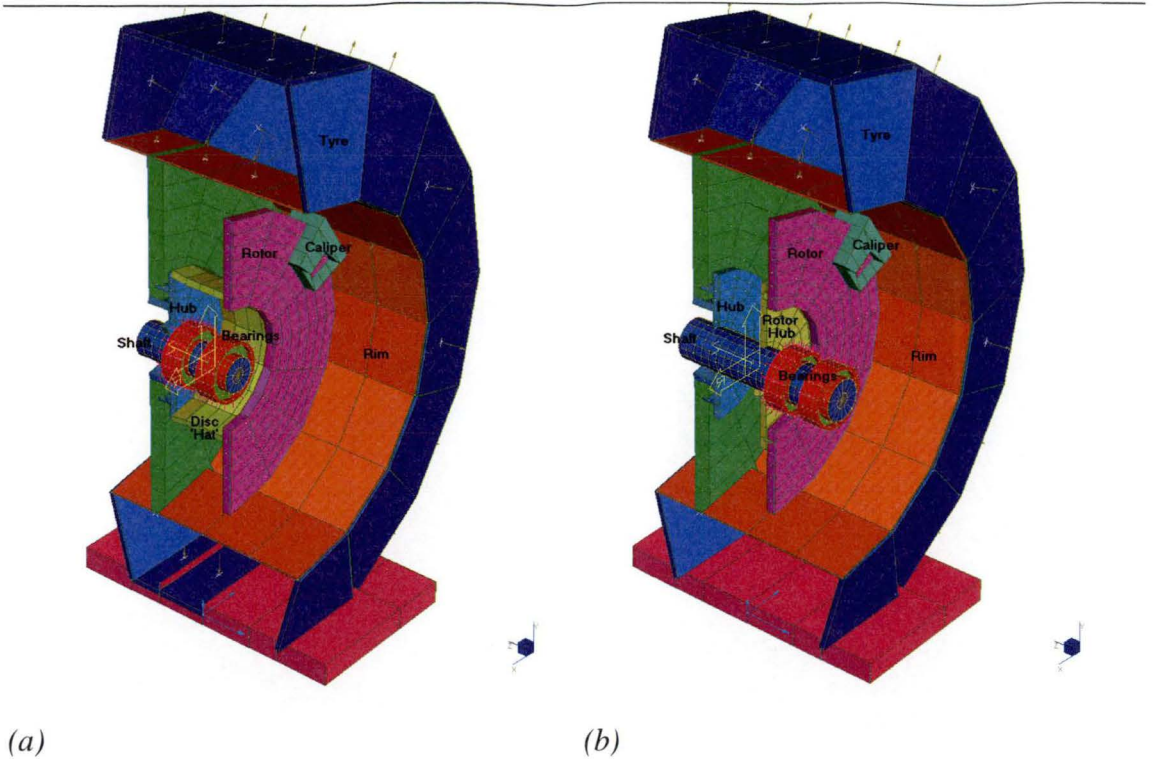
FEA wheel model cross sections (a) with centred bearings (b) with off centre bearings [36]
